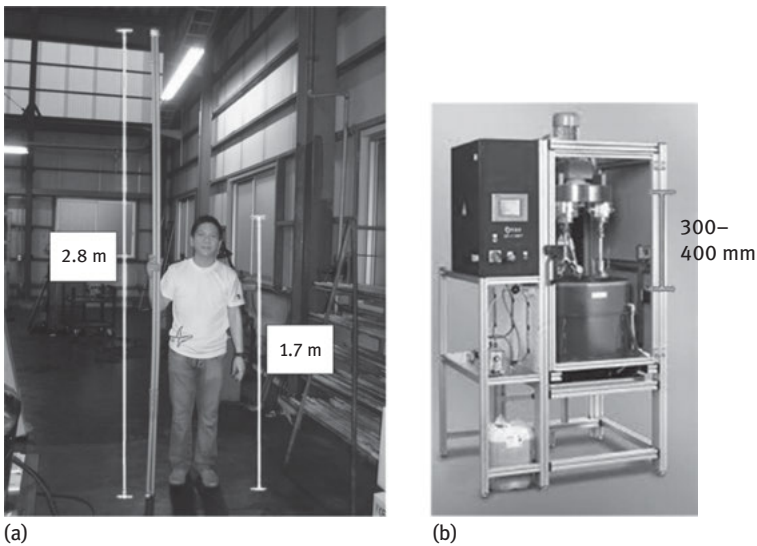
(a) Illustration of a 2.8-m gun drill for high aspect ratio drilling on Inconel 718 and (b) limited working space of a standard drag finishing machine.
